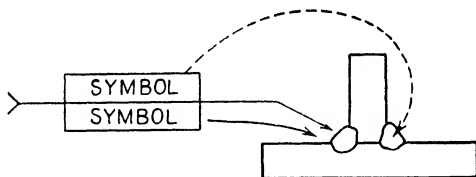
The base line from which the American Welding Society's welding symbols start is an arrow that shows the location of the weld; the position (above or below the line) of the data referring to welds on either side of a joint is as shown.
